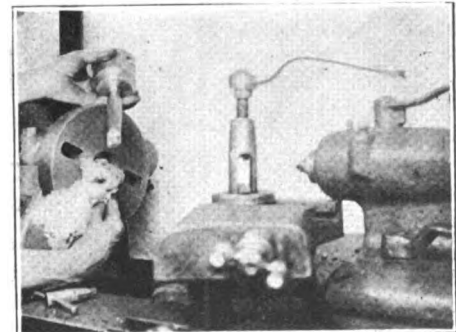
Sleeve Placed on Chuck So It Will Fit Into Spindle.
